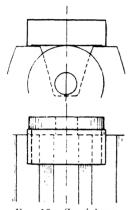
Special gage block used to position the disks against the outer surface of the gear.
